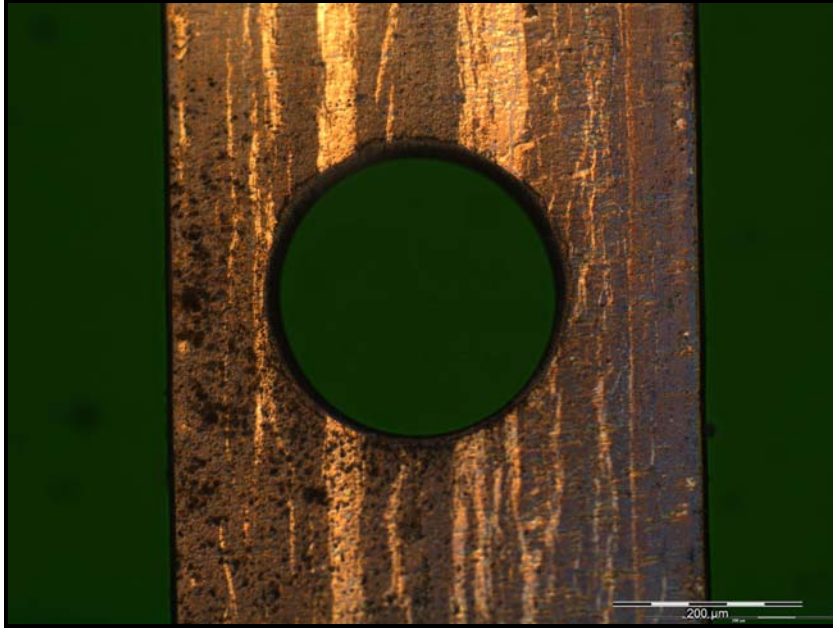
A 300 μm diameter hole drilled in 50 μm Nitinol sheet.
